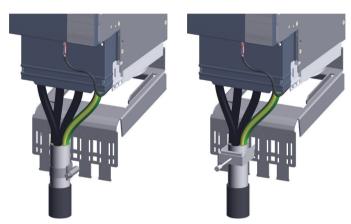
Shield support with a hose clamp (left) and a shield connection clamp (right)
